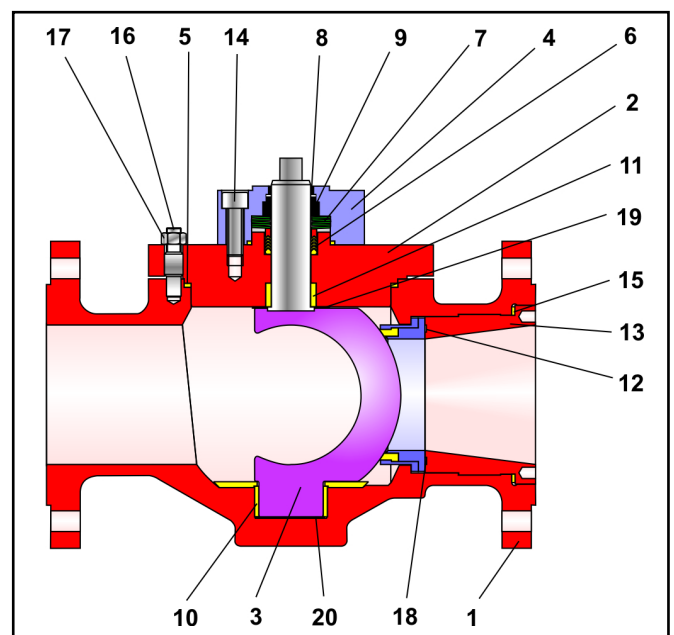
Sectional diagram of Series 23b Rotary Plug Valves => see Table 1 for list of parts
